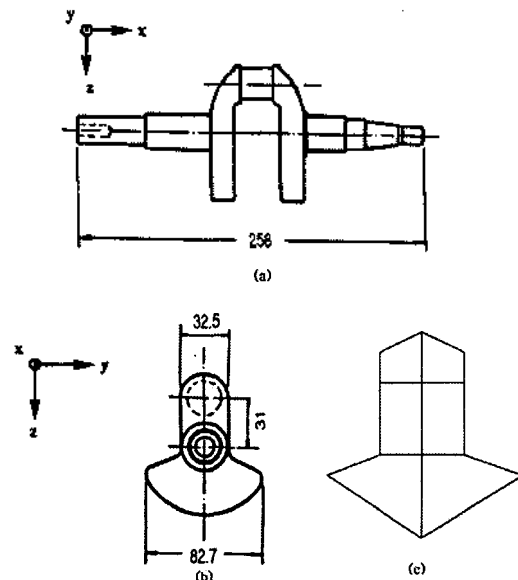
A single cylinder engine crankshaft (a), (b) unit; mm and discretization of the crank web (c).
